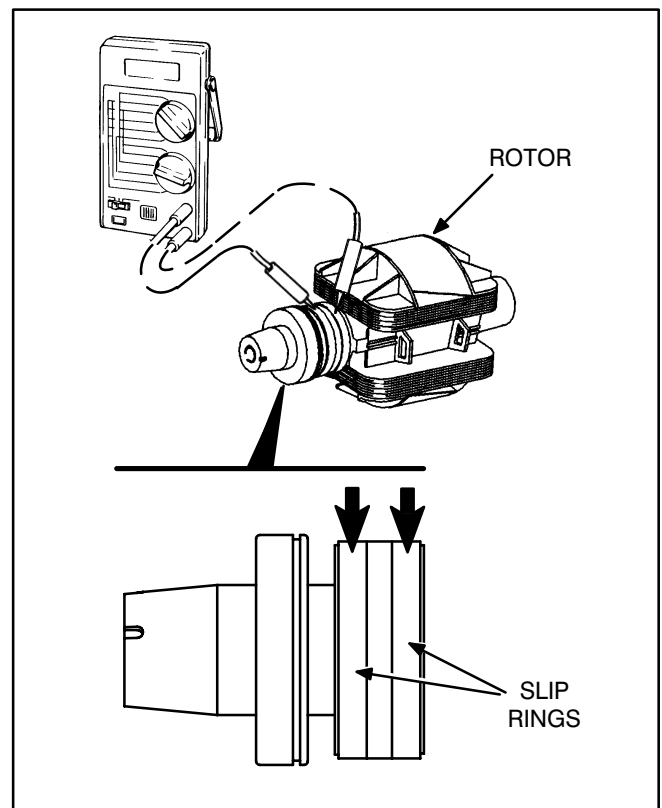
OPEN OR SHORTED ROTOR TEST
